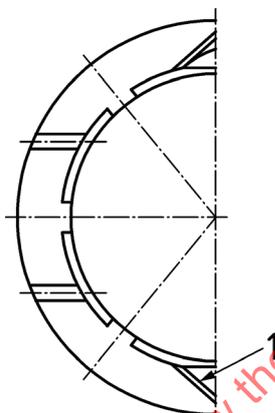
Type of transition between half bearing and flange of a assembled flange bearing
